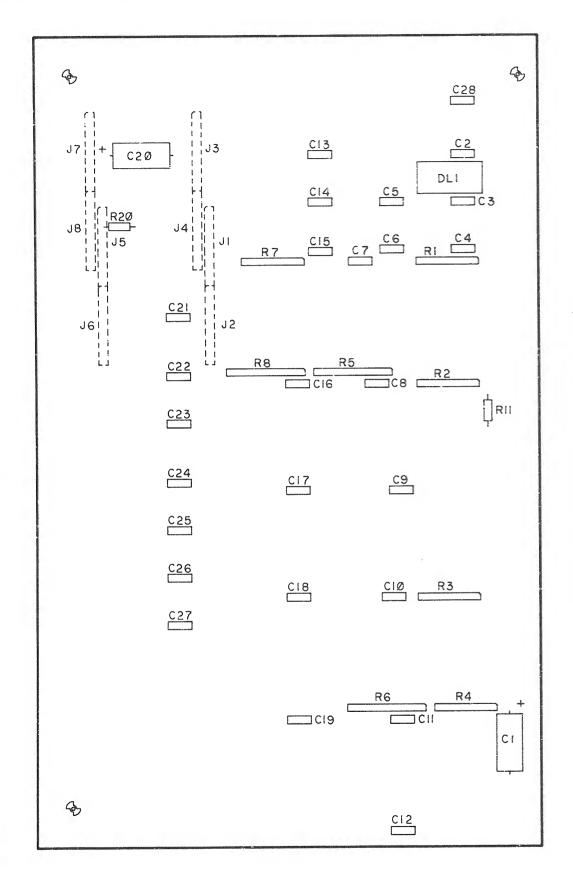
Daughter Board Parts Location (Sheet 2 of 2)
